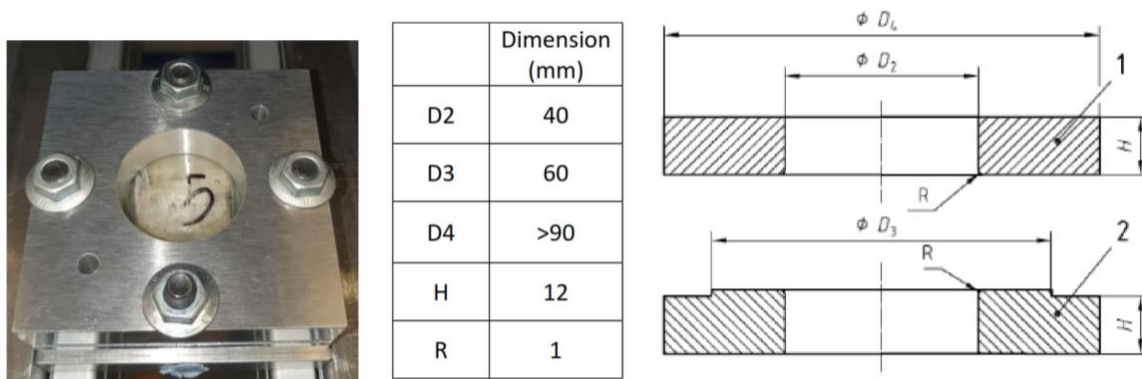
Schematic and real figure of ISO 6603-2 test fixture.
